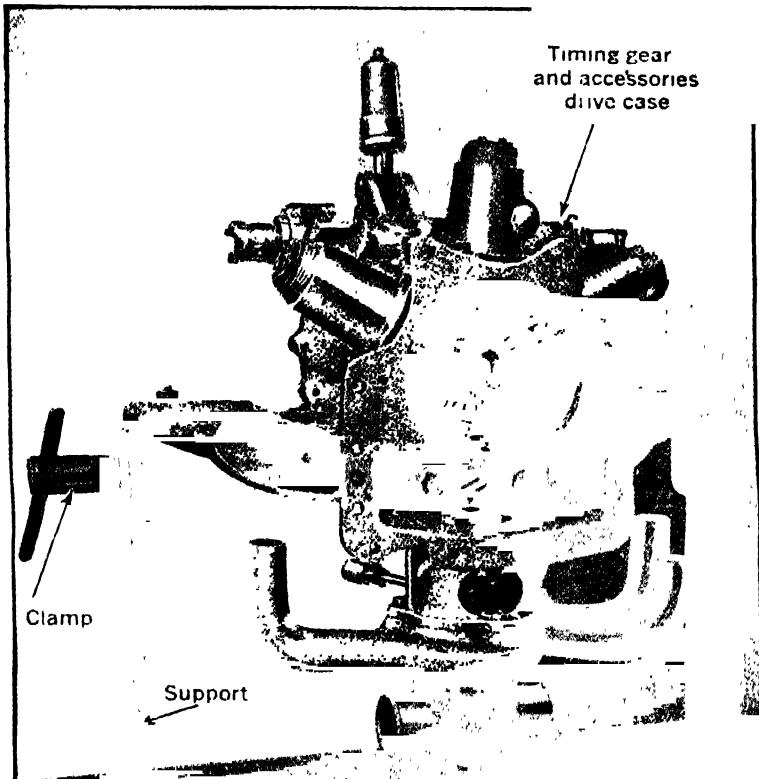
Special Swinging Stand for Accessories Drive Gears of Napier "Lion" Engines Useful to Illustrate Possibilities with Stands of this General Character for Other Assemblies.
